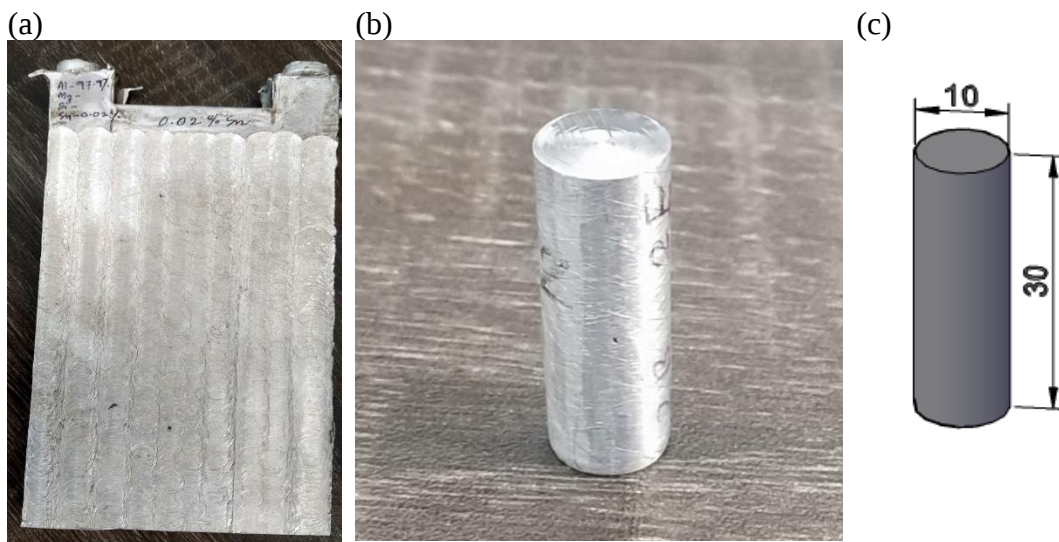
1: (a) Al-Mg-Si alloy with 0.08% Sn Plate (b) Pin specimen (c) Pin dimensions (mm)
